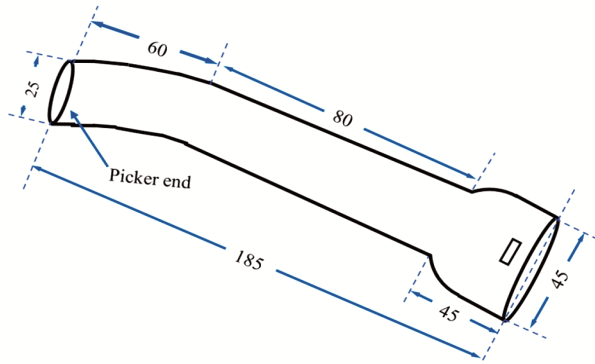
CAD view of the tubular anthracite end-effector (dimensions in mm).
